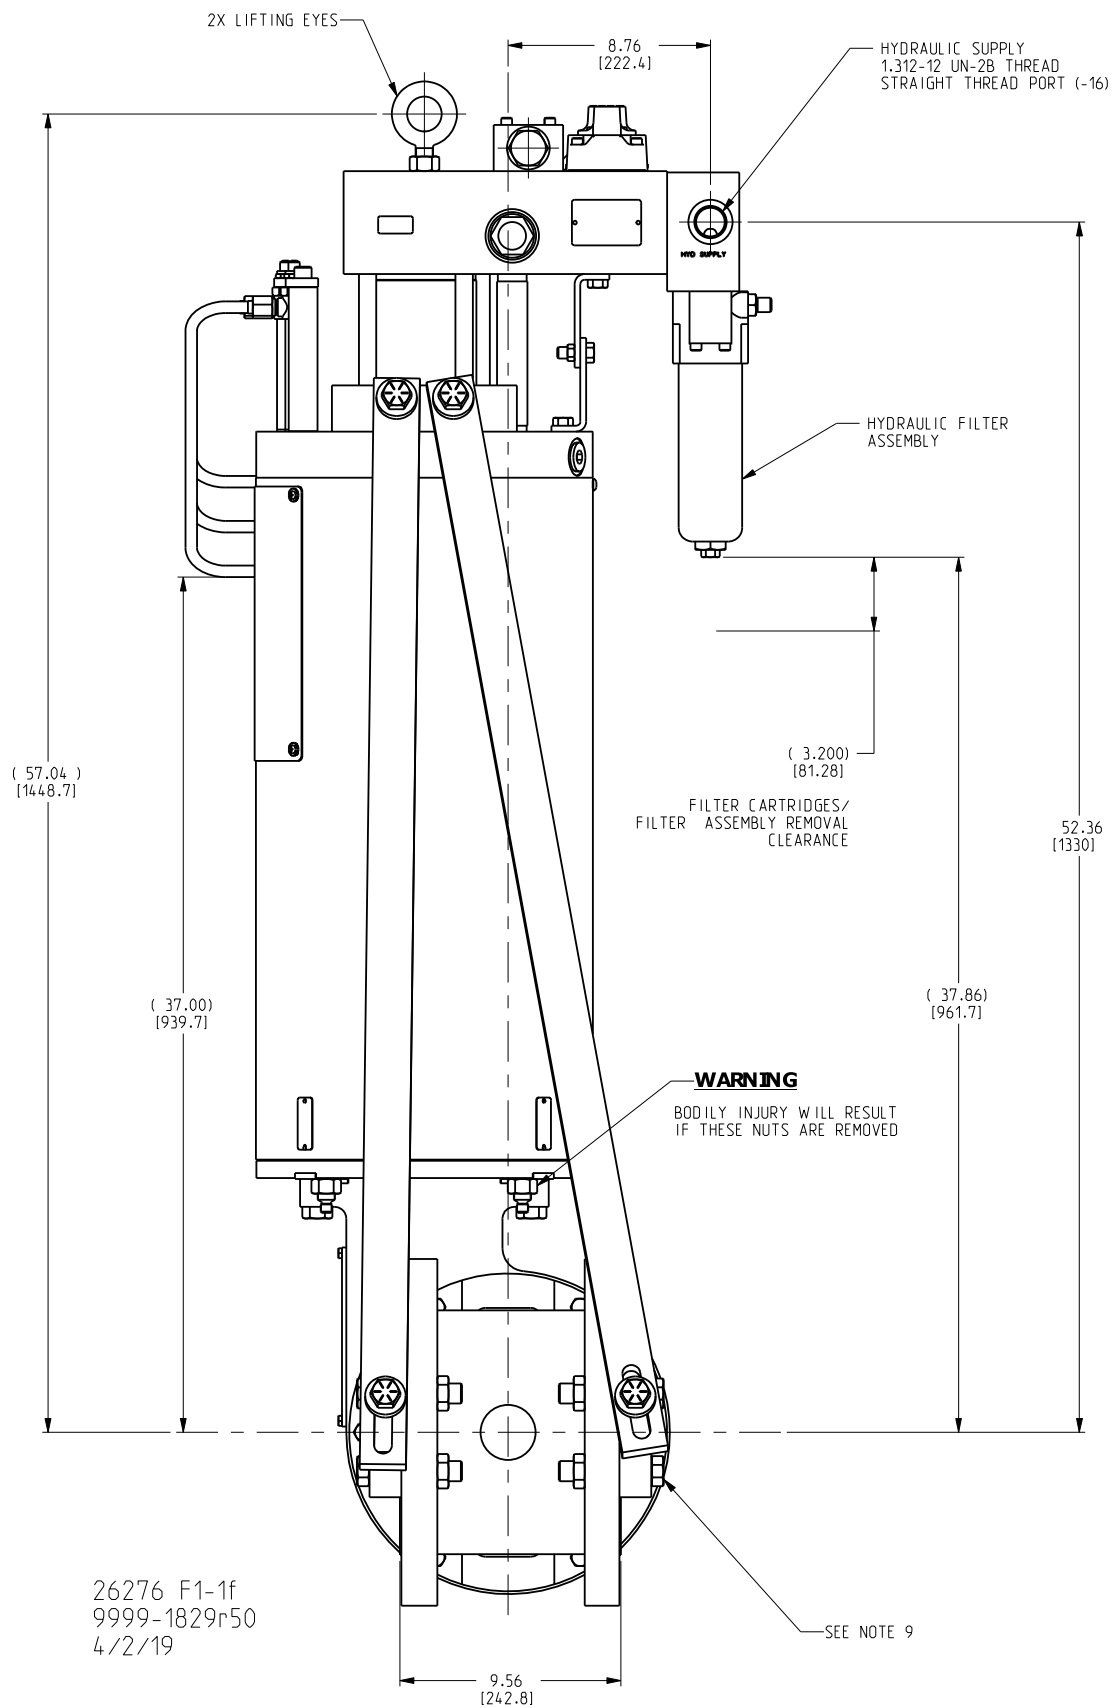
8-inch SS-260 Gas Stop/Ratio Valve with SST Junction Box Outline Drawing
